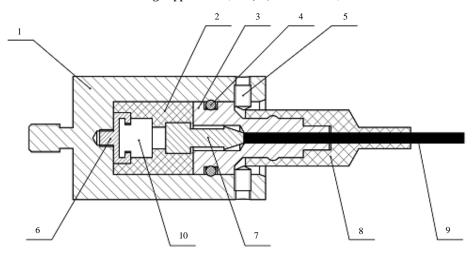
Separable structure of submerged sensor; 1) Pressure-bearing hull; 2) Liner bushing; 3) Seal cover; 4) O-ring; 5) Bolt; 6) Base; 7) BNC connector; 8) Rubber sleeve; 9) Cable and 10) Sensor body
